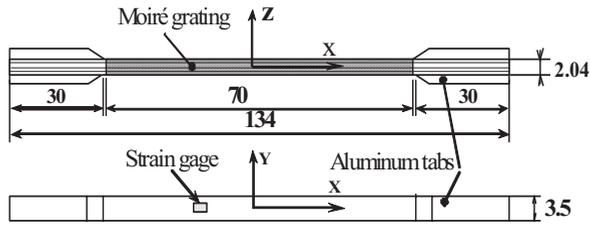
AS4/PEEK laminate specimen geometry (mm)
